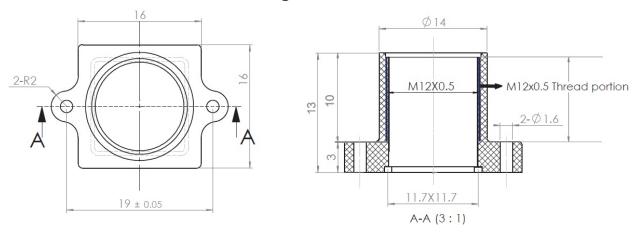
e-CAM10\_CU0130\_MOD camera module's S-Mount holder outline dimension drawing
